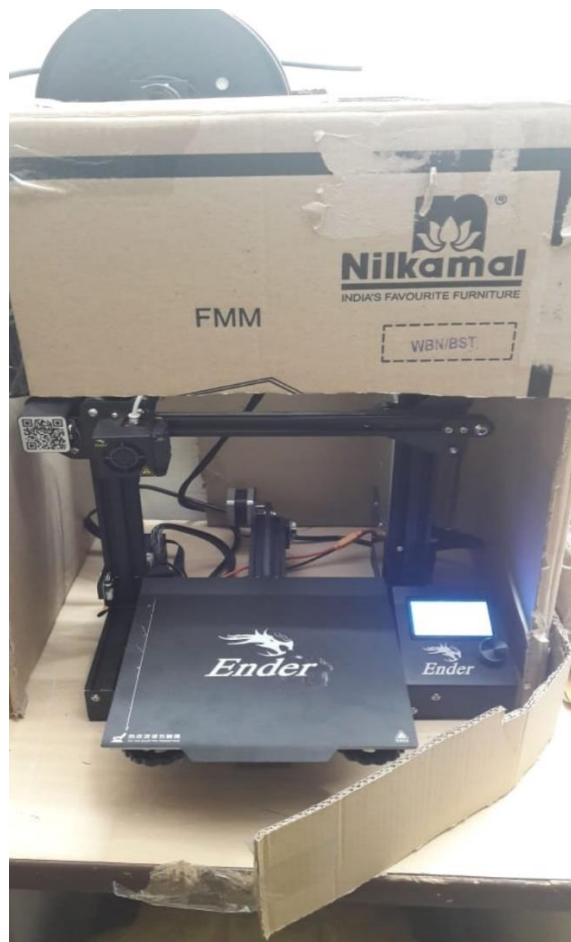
3D Printer bed and trap heating after initial filament and nozzle check
